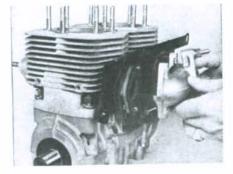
Install intake or exhaust manifold to align cylinders before tightening cylinder mounting stud nuts.
